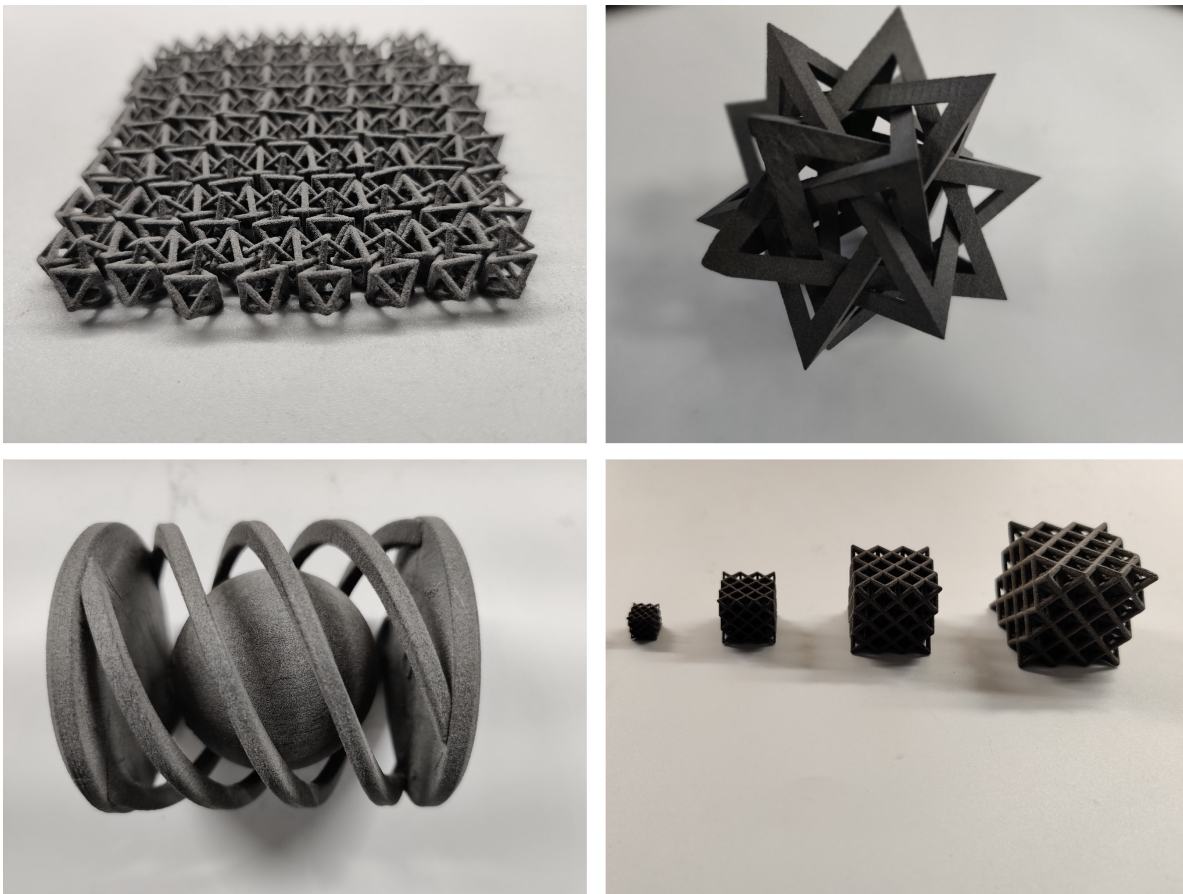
Exemplary printed parts with distinct interlocked shapes and fine features.
